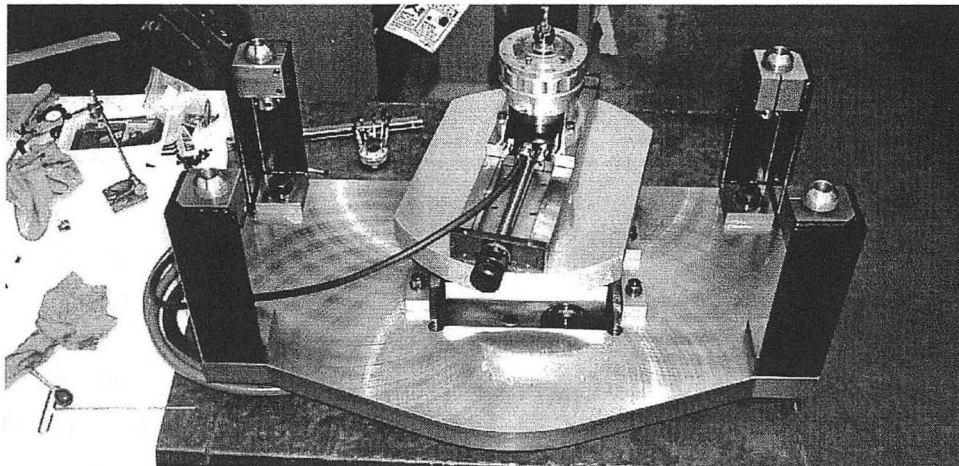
Tooling for Machining Storage Ring Vacuum Chamber
